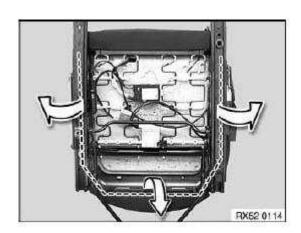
Removing Padding With Seat Cover From Seat Mechanism Courtesy of BMW OF NORTH AMERICA, INC.
